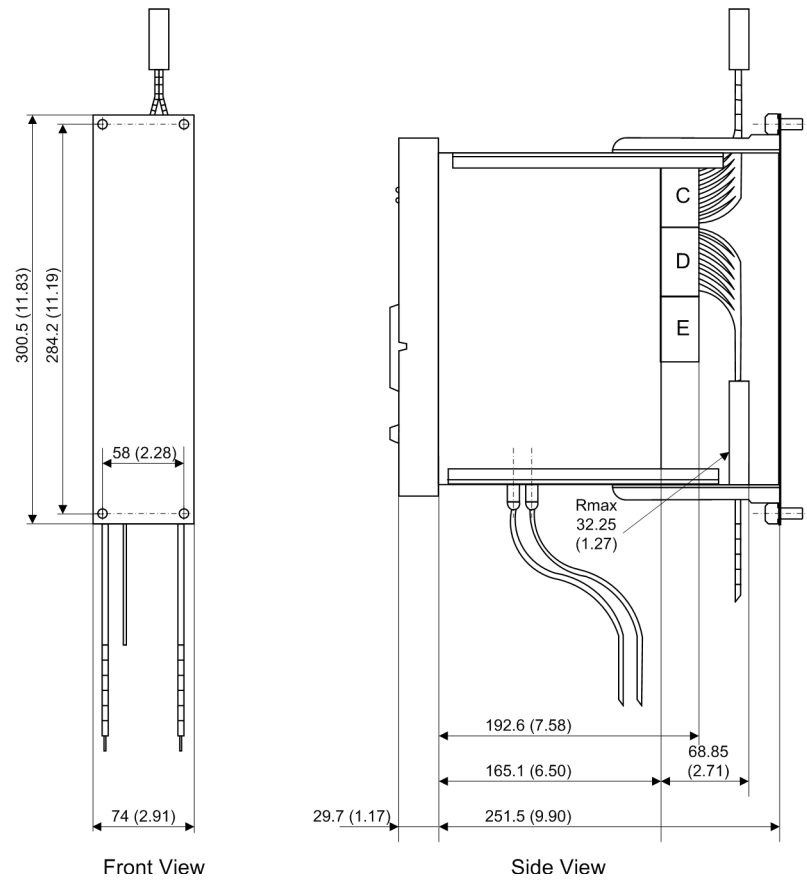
Dimensional drawing of a 7RW80 for panel flush mounting (housing size 1/6)
